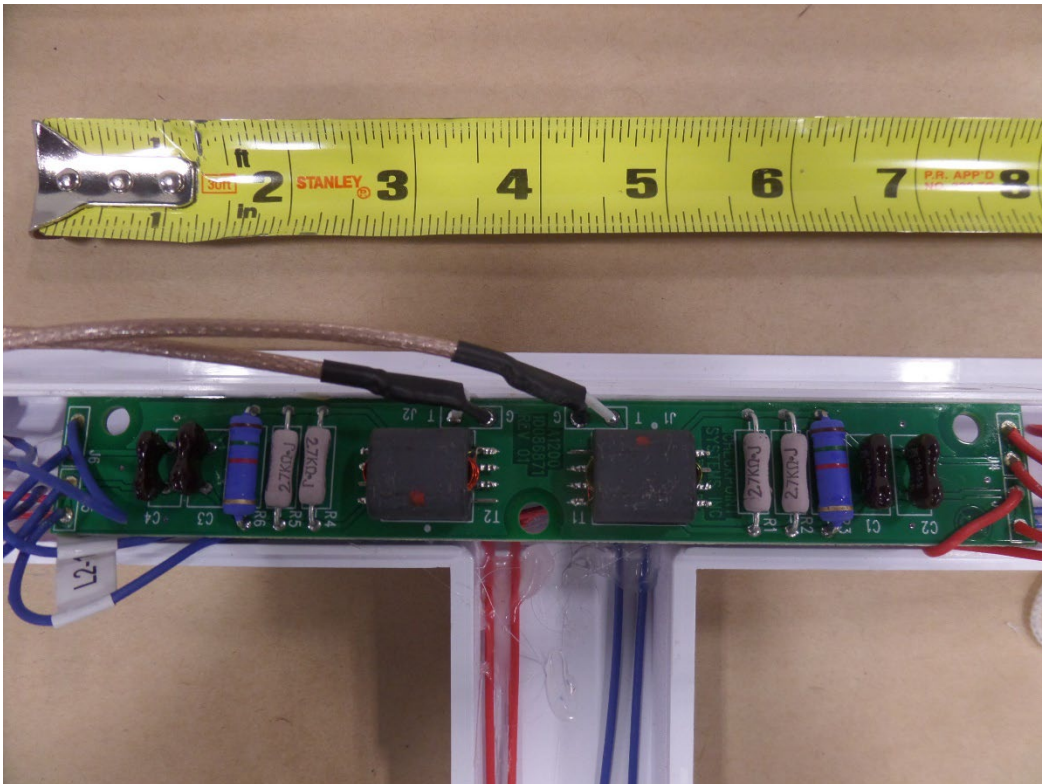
NP22 PRI/PAB/SAB RF ANT FRAME MATCHING BOARD TOP SIDE
